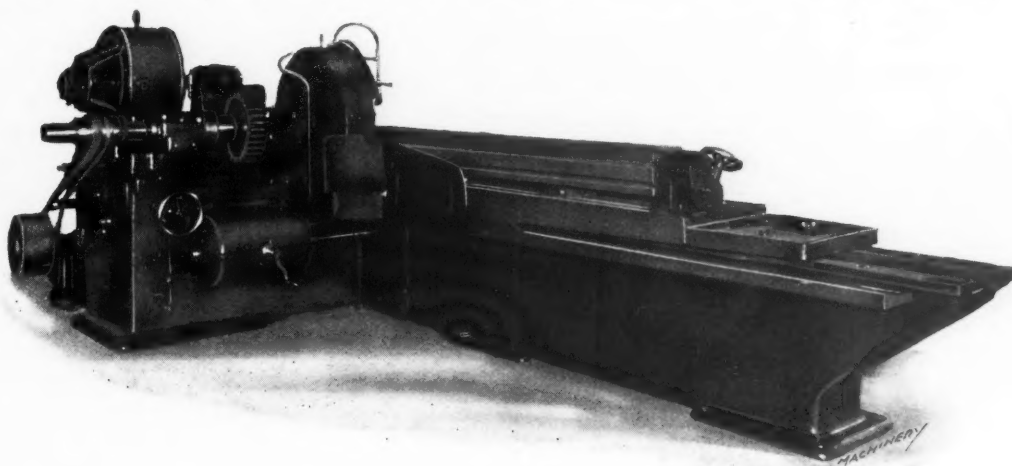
End View of Diamond Shear-blade Grinding Machine, showing Arrangement of Drive and Rear Operating Mechanism
